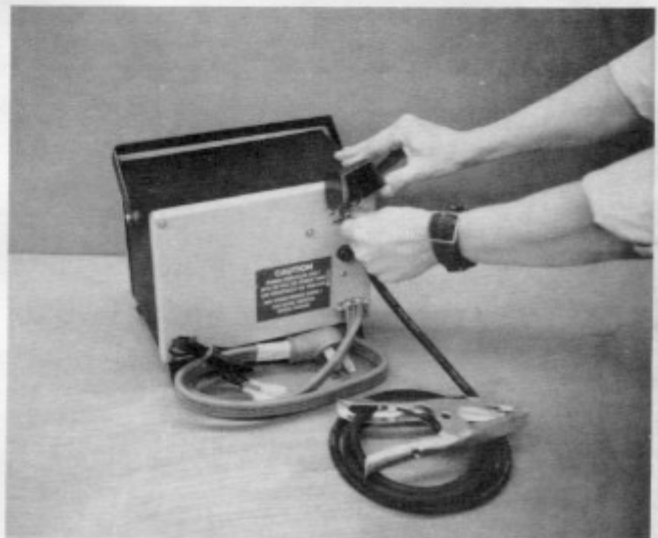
Back View of Welder Showing Ground Clamp Cable and Cord.
